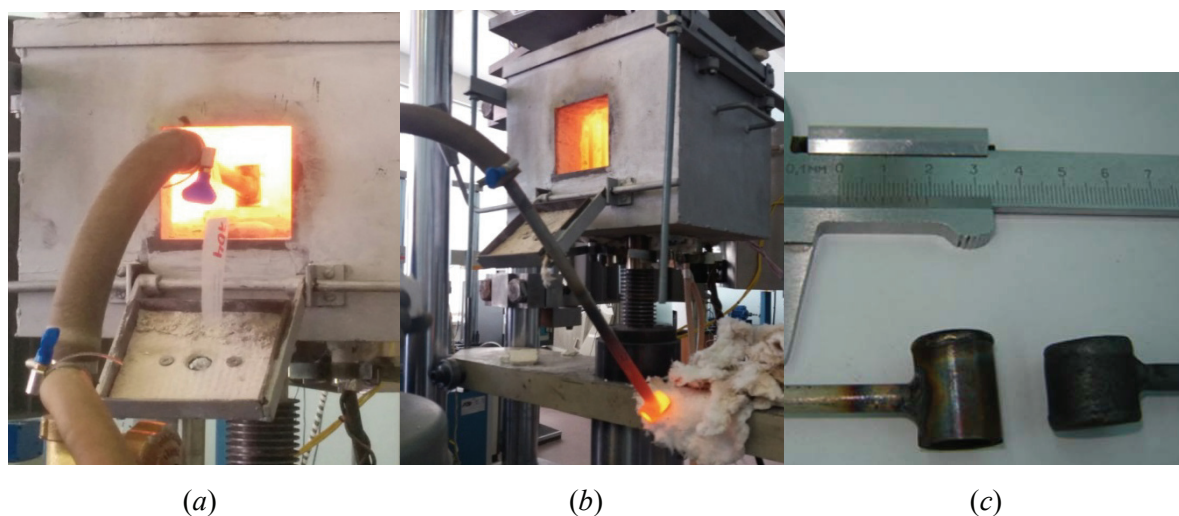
The working zone of the furnace of the UVSD-1 installation for high-temperature pressure welding based on the RMS-100 testing machine from SCHENK (a, b) and samples before and after pressure welding in sealed containers (c)
